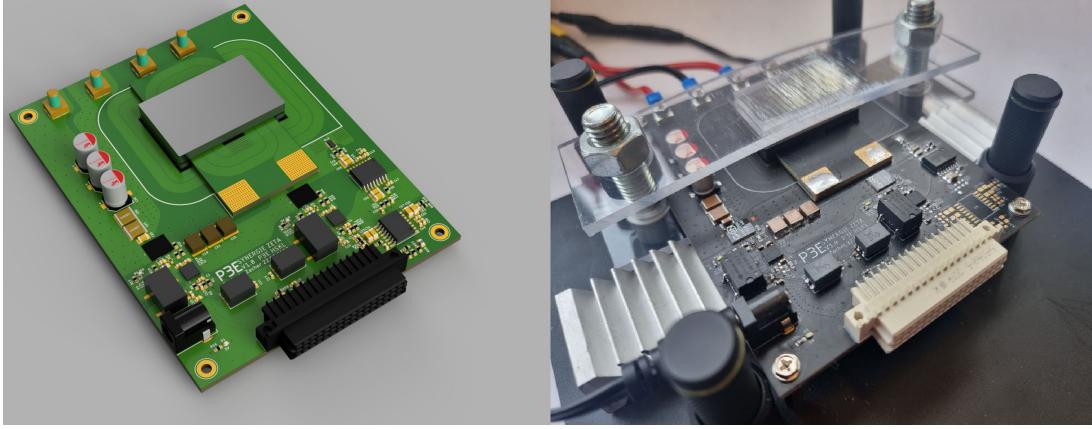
3D model of the experiment (left) and realized PCB (right)
